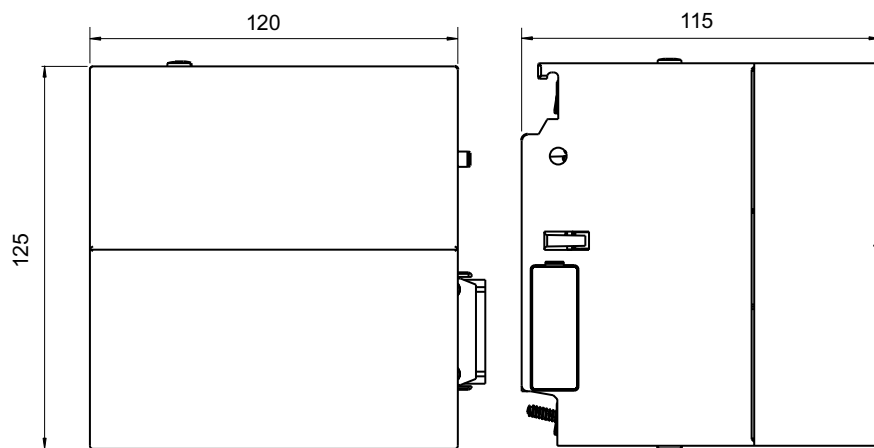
Dimensional drawings EM PCI-104 interface module (dimensions in mm):
